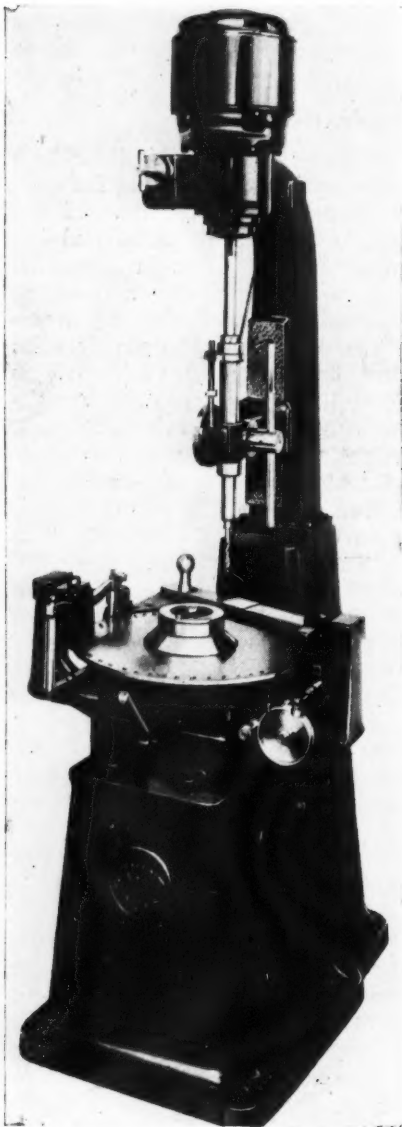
Gisholt static balancing machine, for flywheels, etc.
